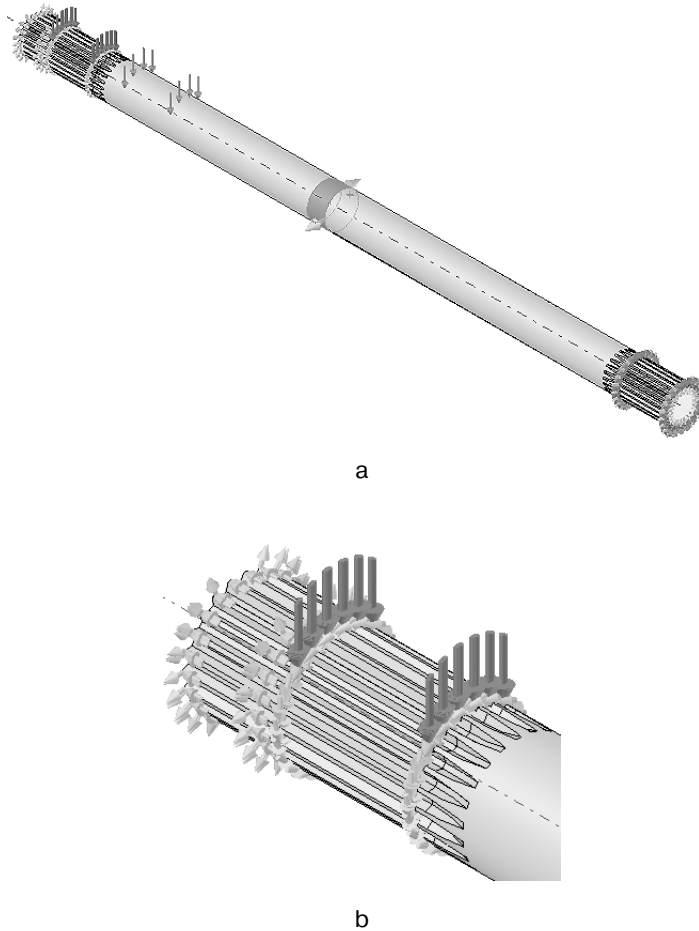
Model of the reducer shaft: a — loading and constraints of shaft; b — spline part of shaft that is in contact with the central gear
